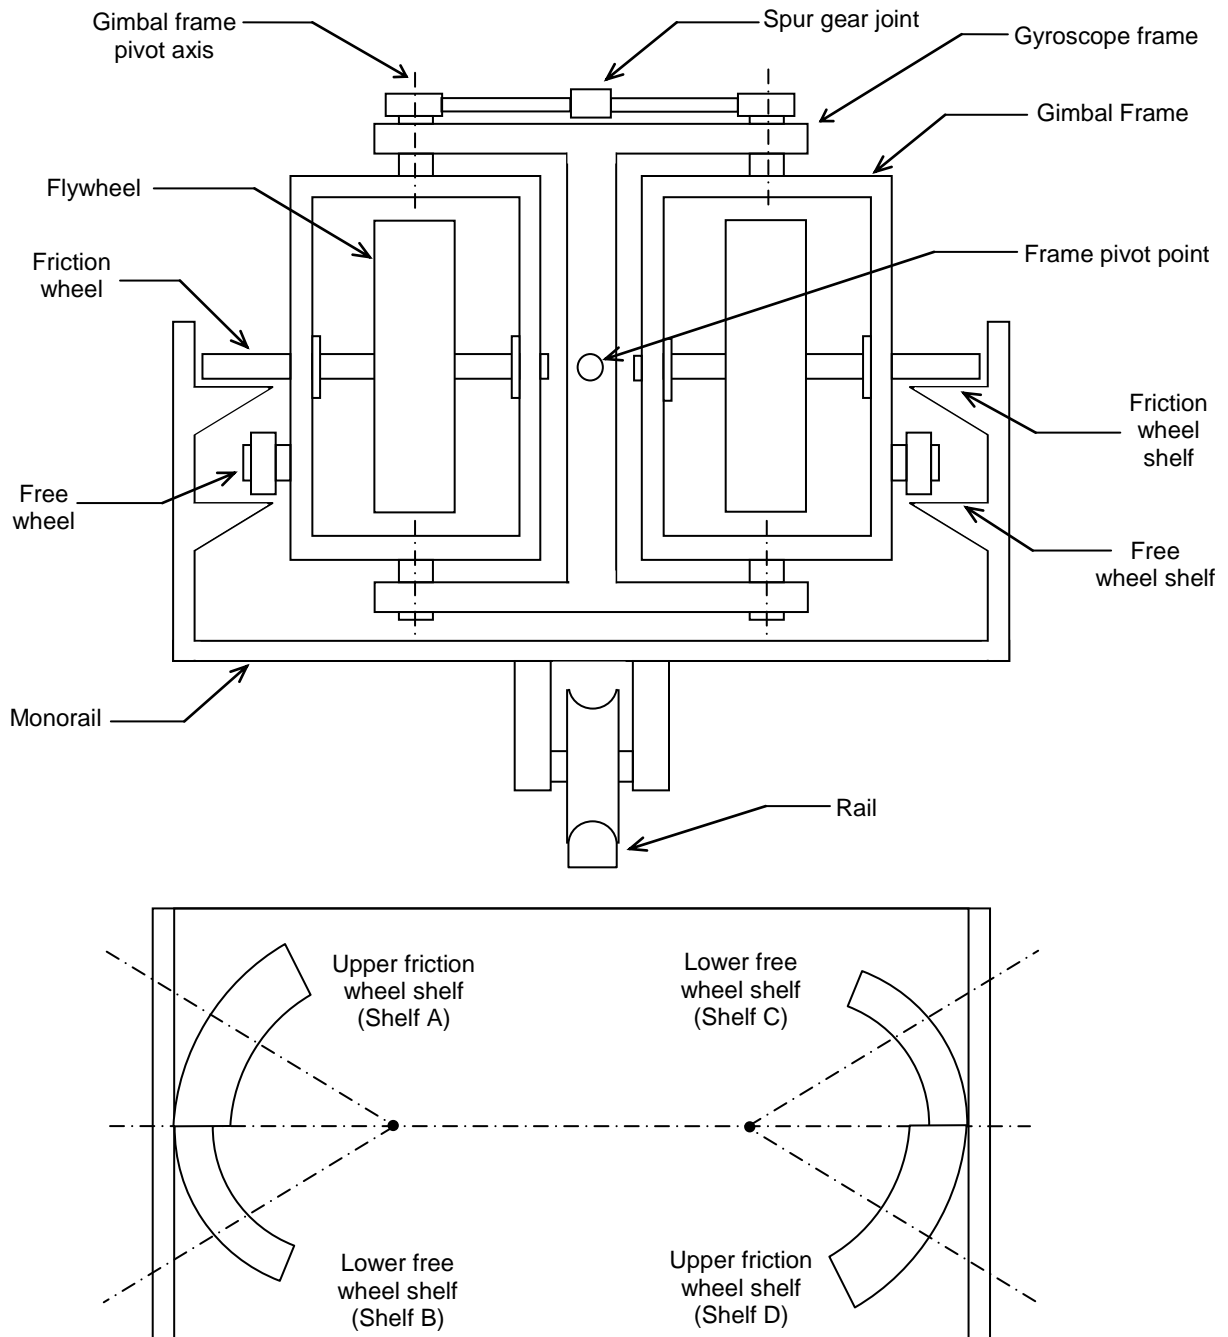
Brennan monorail layout (top) and plan view of outer shelves (bottom)
